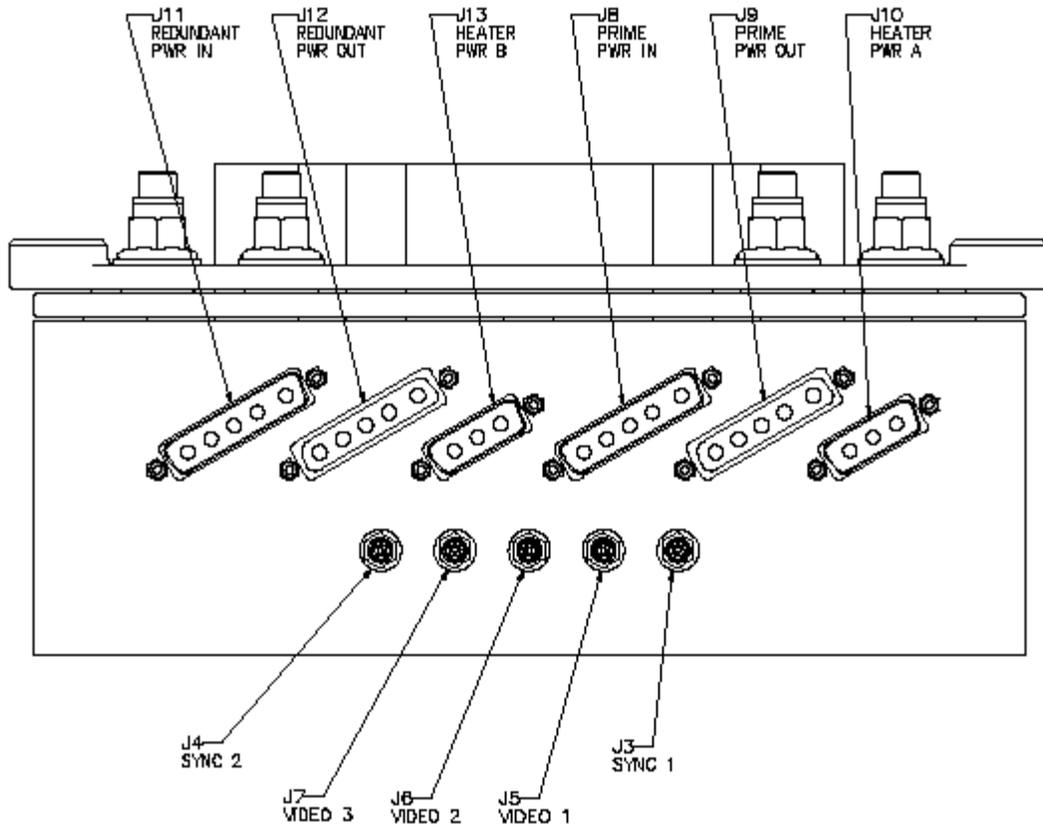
EBCS AVIONICS PACKAGE MOUNTING INTERFACE DIMENSIONS
